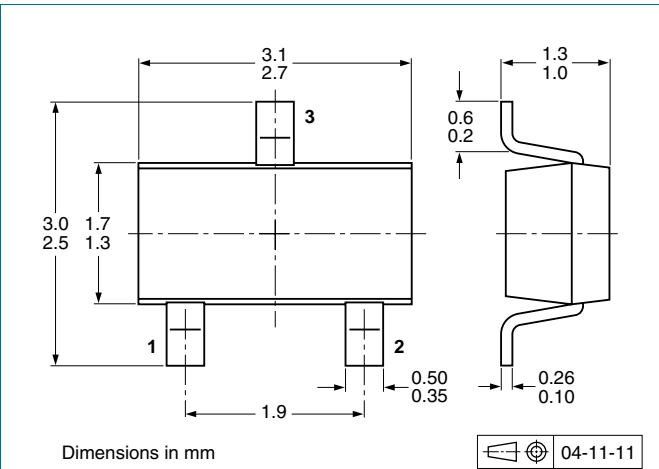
Package outline SOT346 (SC-59A/TO-236)
